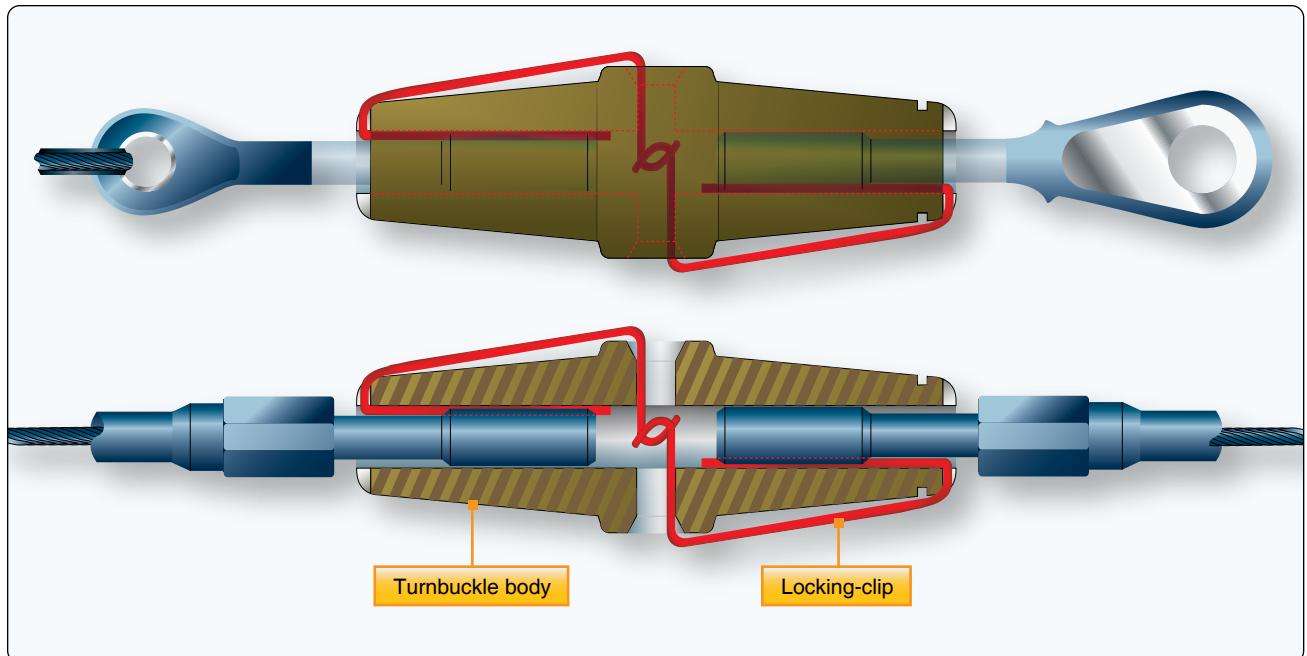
Clip-type locking device and assembling in turnbuckle.
